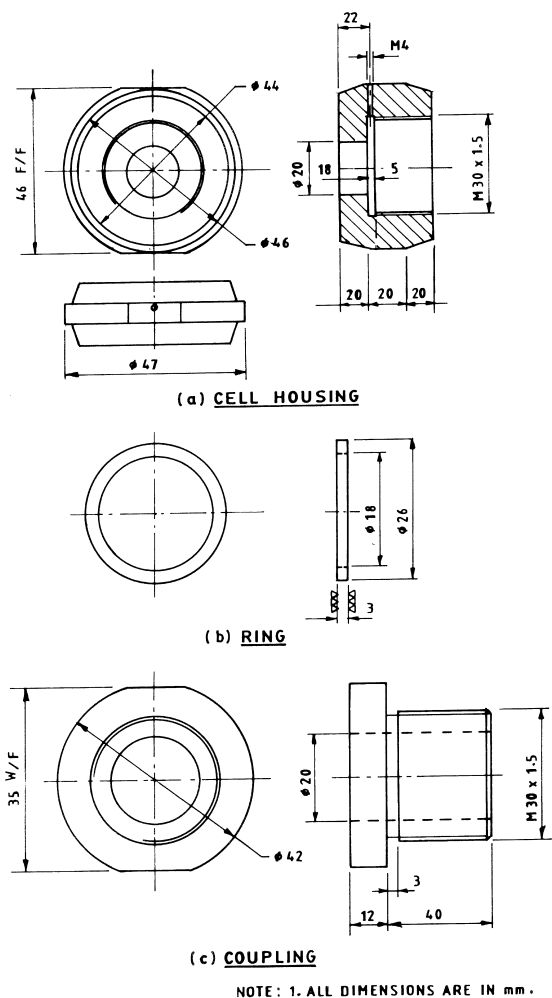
Teflon holder assembly (a) cell housing; (b) ring; and (c) coupling.
